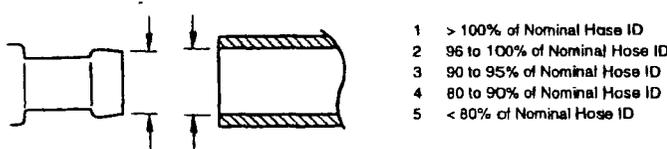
HOSE ASSEMBLY—LEAD END DIAMETER OF FITTING
